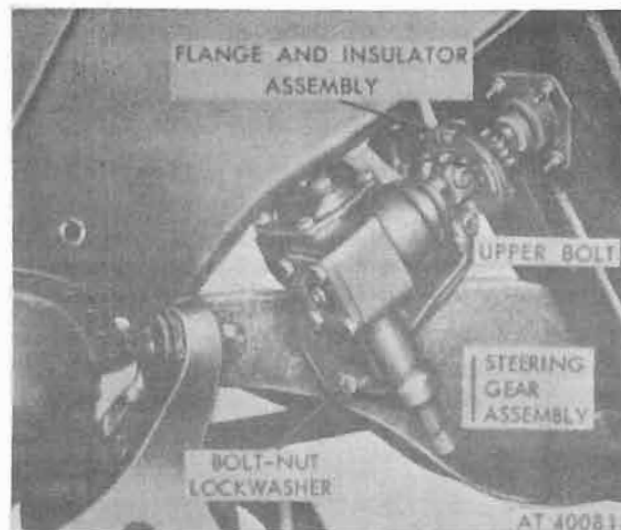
Steering gear and attaching hardware (M151A2, M718A1, and M825 vehicles).
